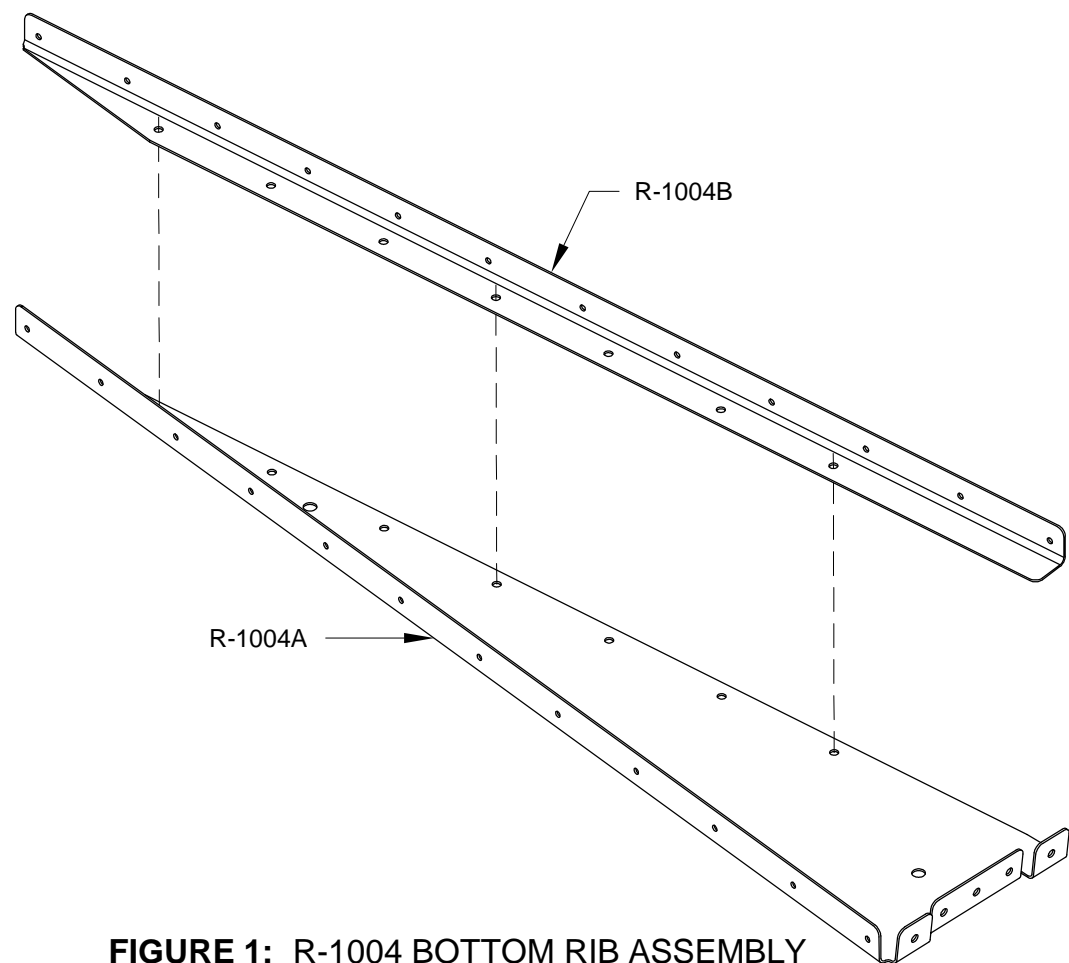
R-1004 BOTTOM RIB ASSEMBLY
